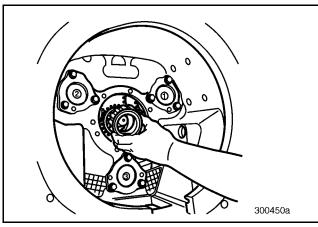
Sliding Clutch and Countershaft Bearing Covers Installed
